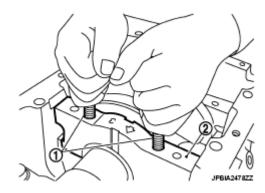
View Of Removing Main Bearing Cap Courtesy of NISSAN MOTOR CO., U.S.A.
